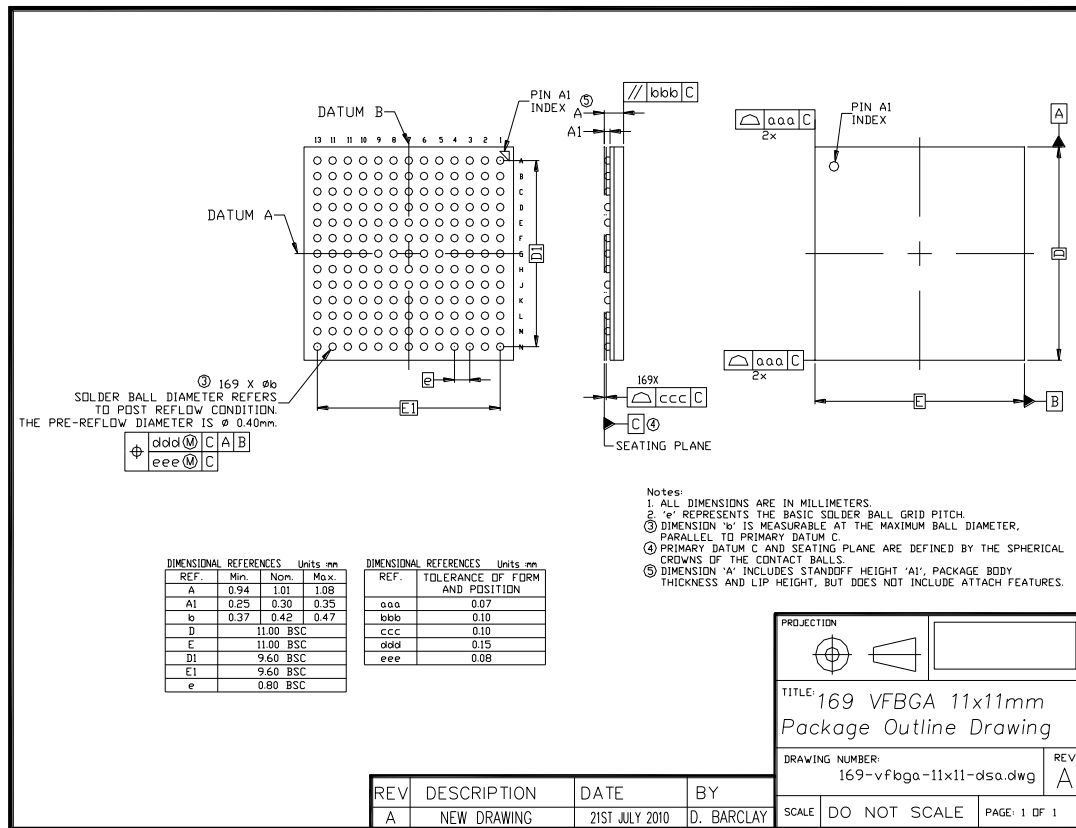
169-VFBGA (11 x 11 mm) Package Drawing
